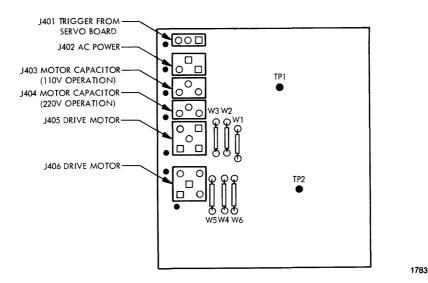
Motor Control PCBA Test Point and Connector Placement
